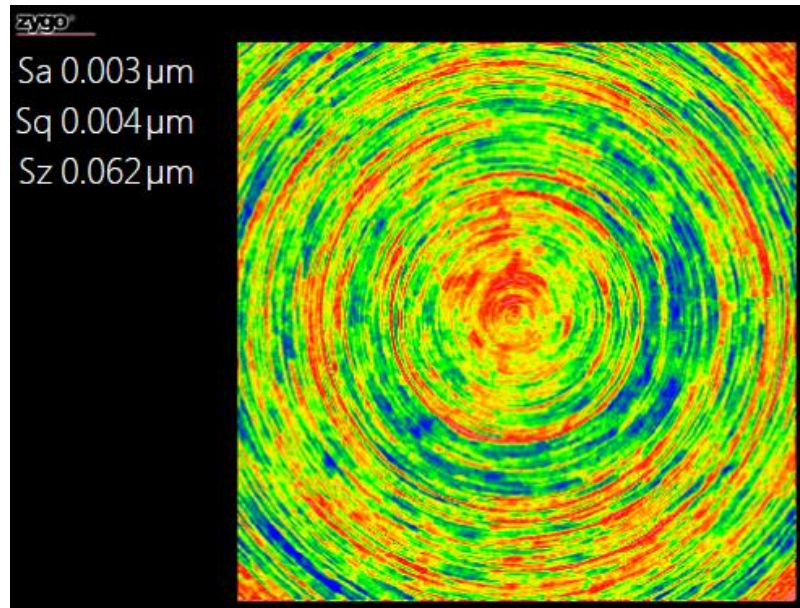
Tool marks on a flat surface generated by the diamond turning process.
